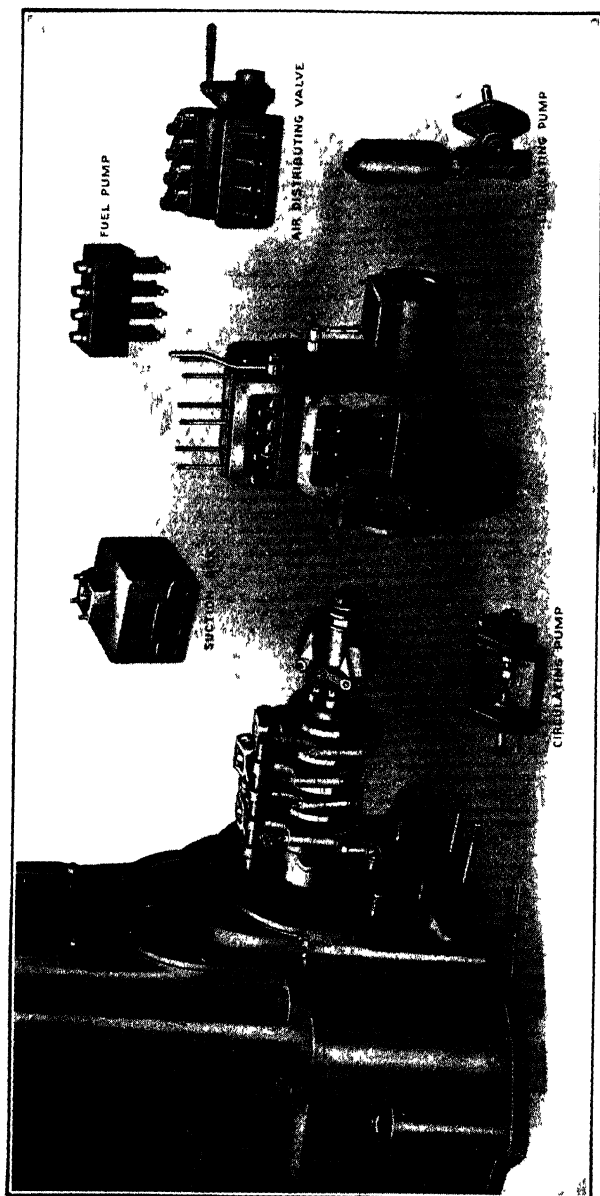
Control Box Parts, Air Starting, Fuel Service and Injection Pumps, Lubricating Oil Pump and Governor, Worthington Engine
